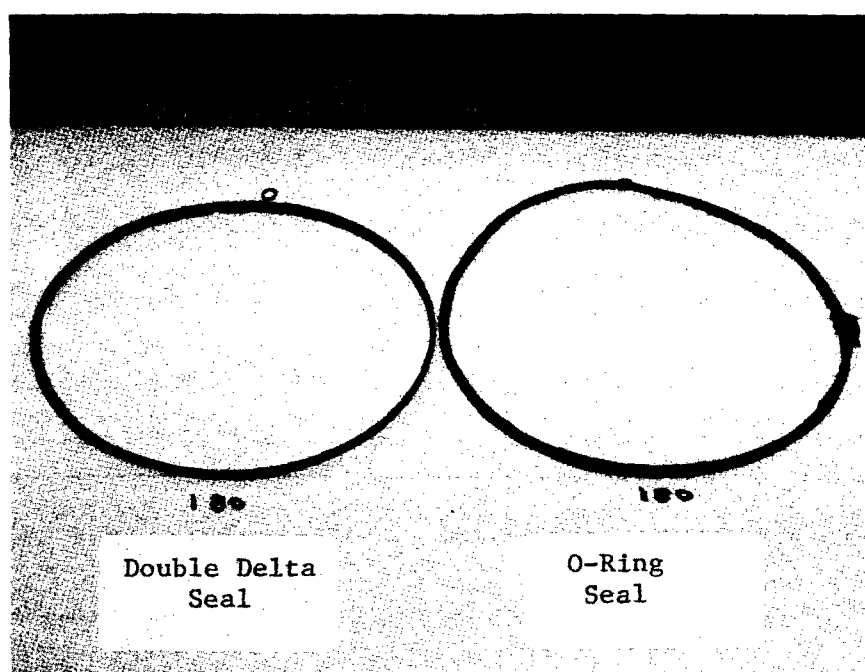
BNL ID #4A-CN5-796-86: Double Delta Chanel & O-Ring Seals
